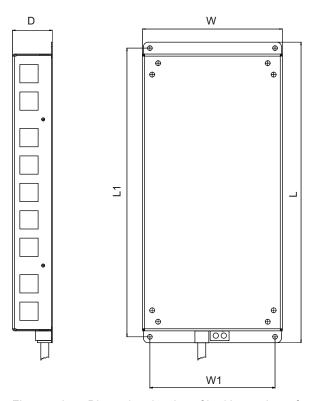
$\,\,$ Dimension drawing of braking resistor, frame sizes FSA / FSB
